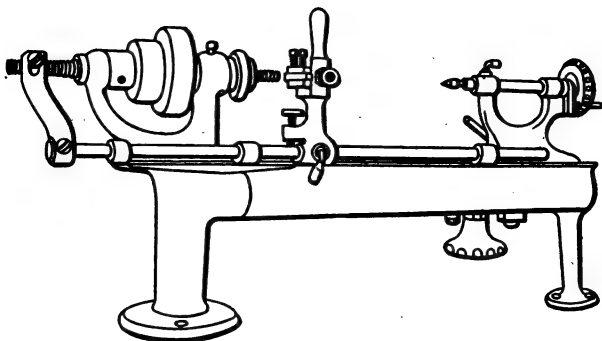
Another type of screw-cutting attachment for a bench lathe.
